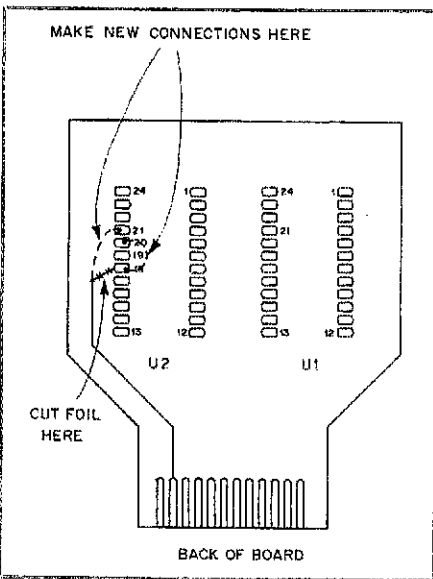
On the back or bottom side of the circuit board one foil trace must be cut and two jumpers added; see text.
